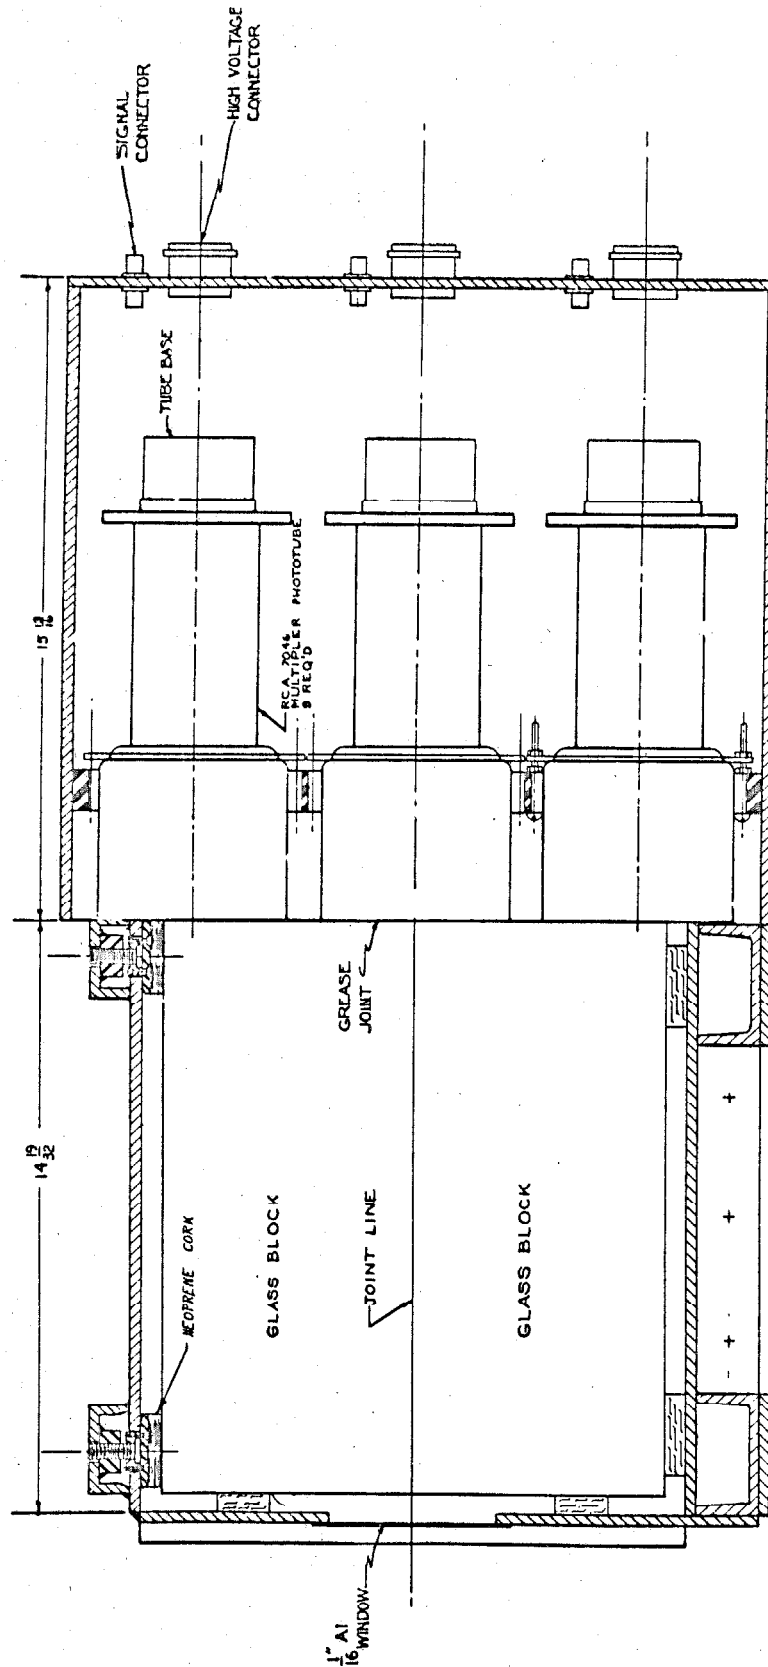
CERENKOV COUNTER ASSEMBLY SHOWING DETAILS OF CONSTRUCTION AND PHOTOTUBE MOUNTING.
